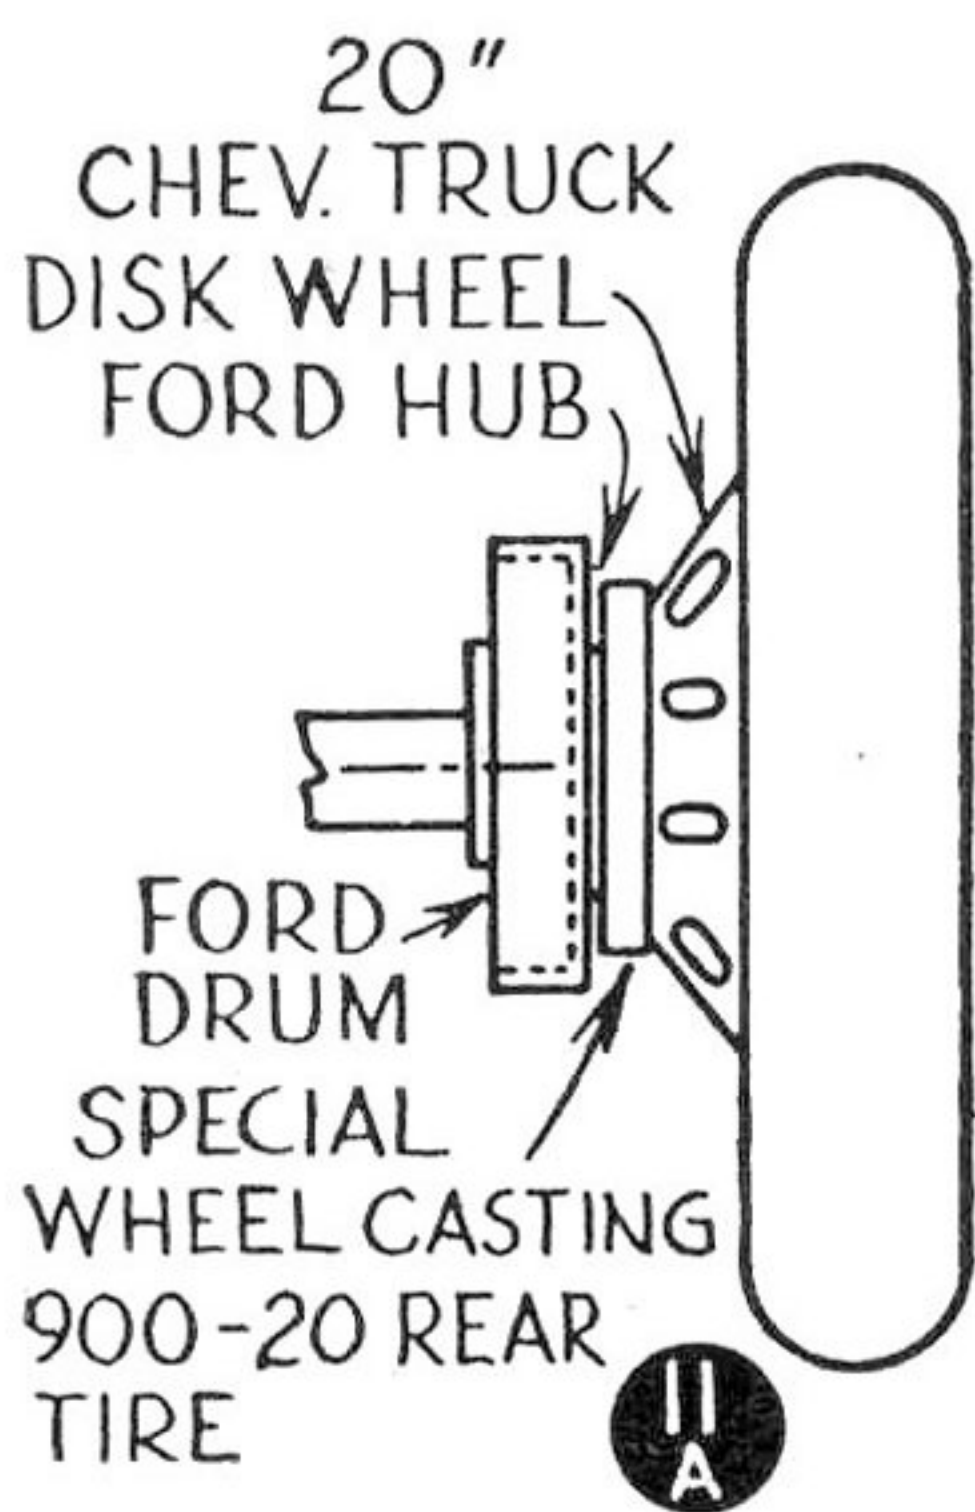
A. Shows a Chevrolet wheel mounted in place on a Ford hub by means of the special castings shown in Fig. 11.
